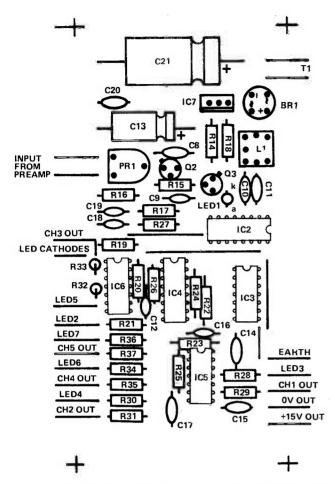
Component overlay for the decoder PCB. Note that LED1 is for setting up only and is soldered to the PCB.
